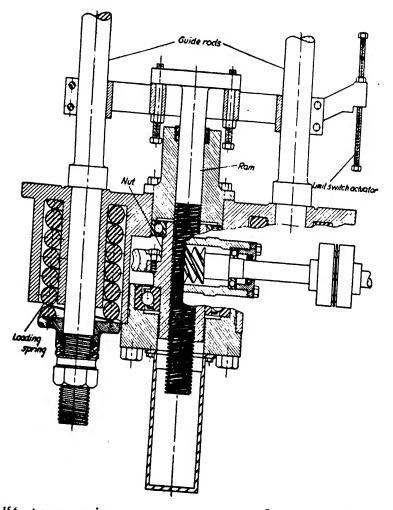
Automatic press. Sectional view of worm and wheel ram drive shows location of loading springs in gearbox away from heat.
